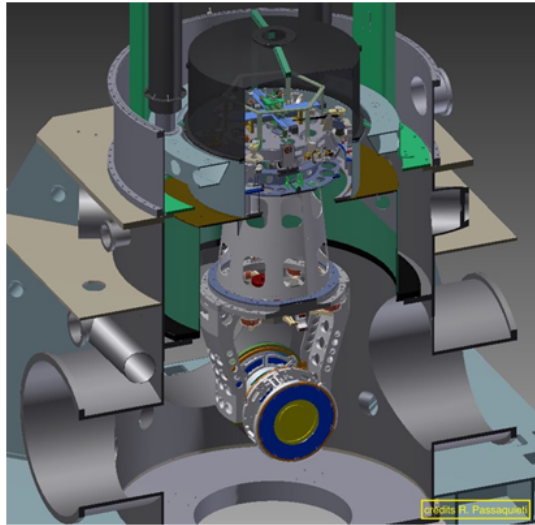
3D technical drawing of the of suspension last stage. The conical interface connecting the Filter7 to the Payload is accommodated within the tower vacuum vessel delimited by the cupola structure.
